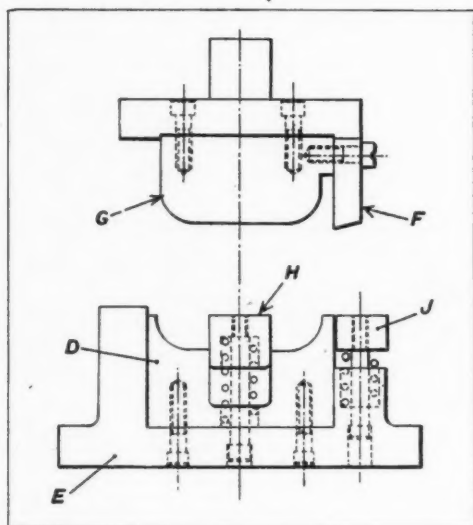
Die Used for Shearing and First Bending Operation on Sleeve Shown at *A*, Fig. 1
